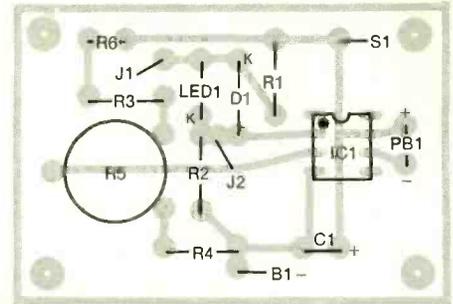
Wiring guide for printed-circuit board. Be sure to use a DIP socket for $IC1$ and observe proper component orientations.
